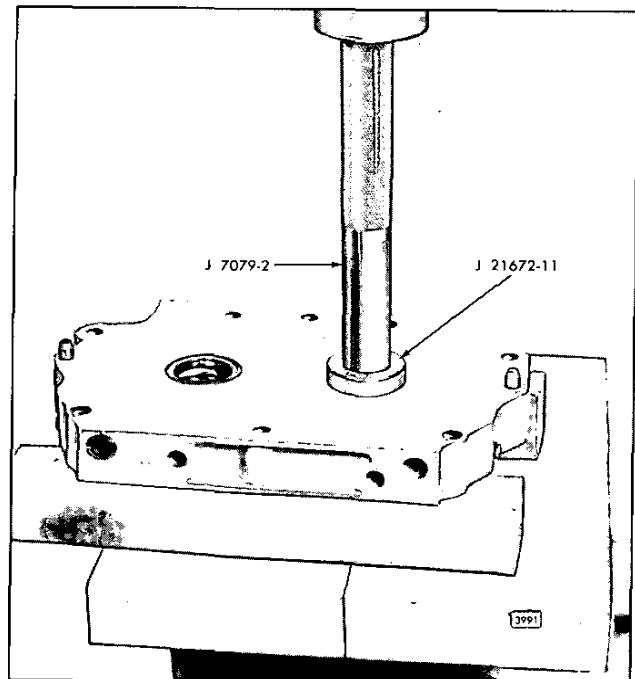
Removing Oil Seal and Roller Bearing from Rear End Plate (Former Blower) Using Tool J 7079-2
